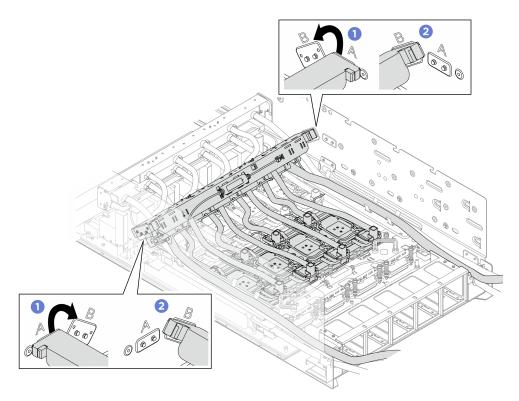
Reinstalling the rear H100/H200 GPU cold plate module manifold
